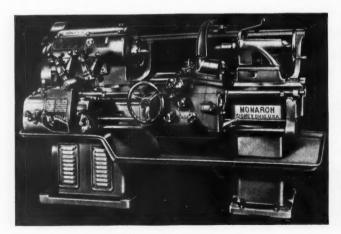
Illustration showing the "Air-Tracer" mechanism applied to Monarch Model C engine lathe
